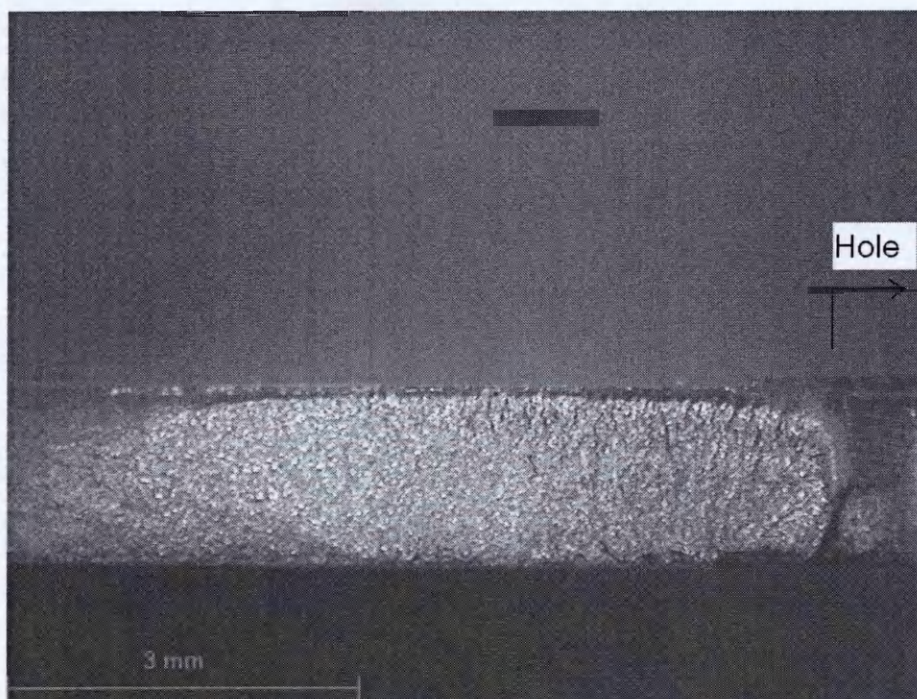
Front fracture surface from testing configuration 2 (Table 6.1.1)
